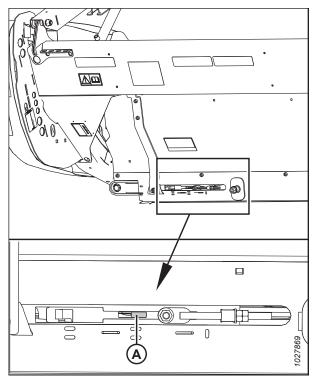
Checking Tension Adjuster – Left Side Shown, Right Side Opposite
